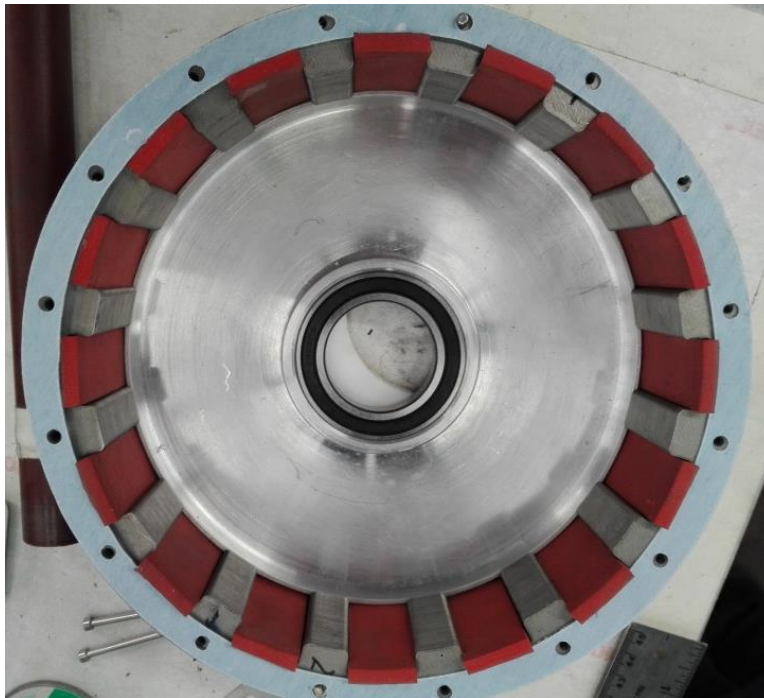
Manufactured rotor assembly (end cover A removed for inspection)
